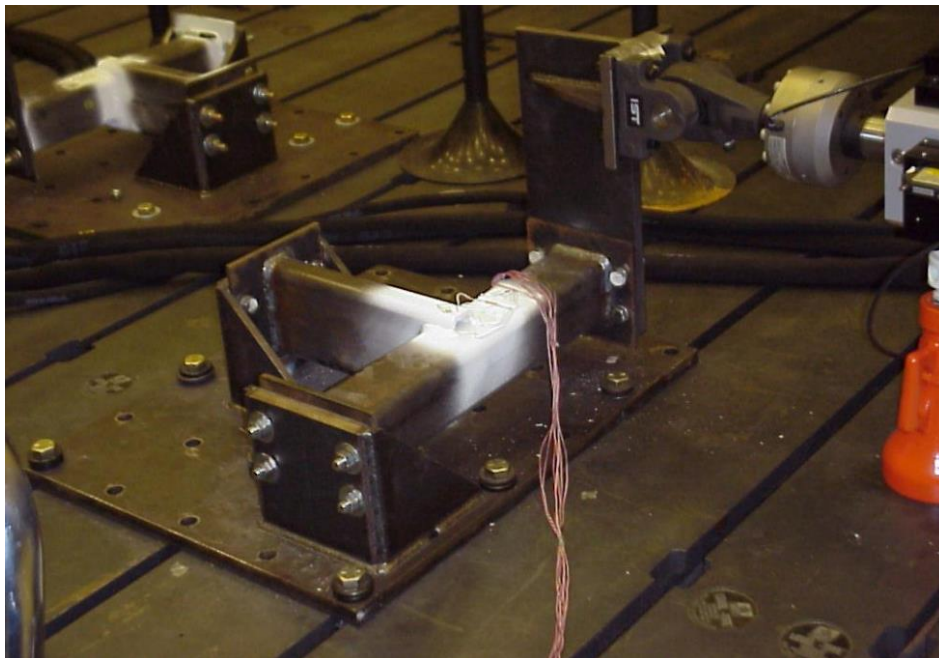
2: JD fatigue test of the tubular welded joint subjected to torsion and bending loading (JD)
